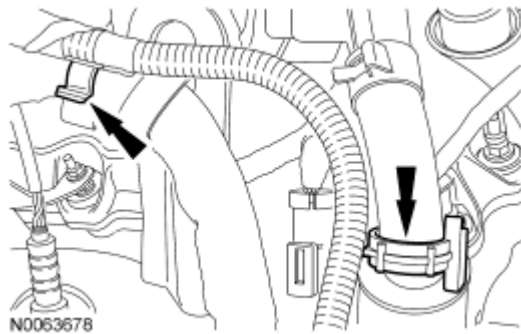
Identifying Block Heater Wiring Harness From Engine
